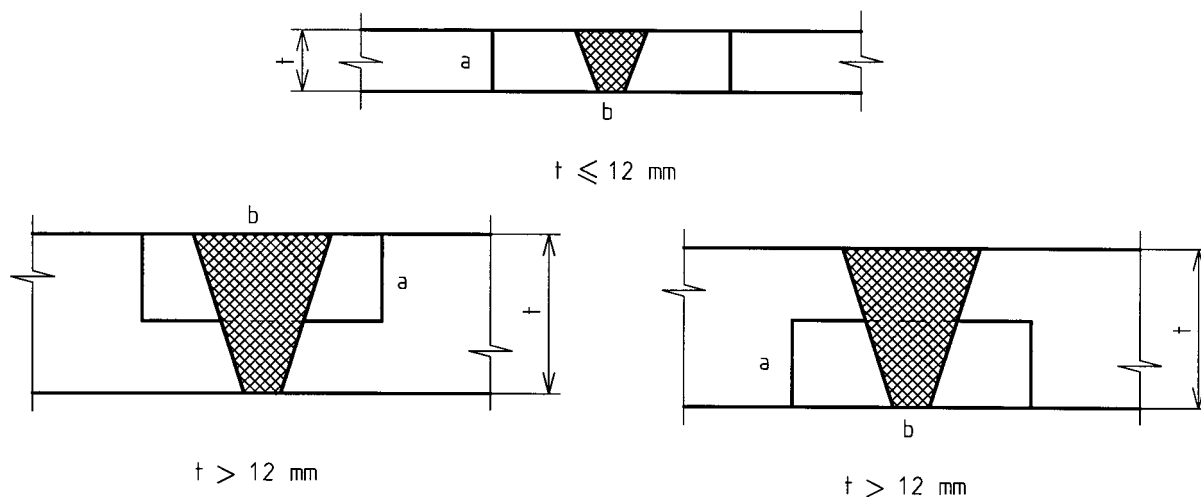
Side bend test specimens of a butt weld (SBB)
